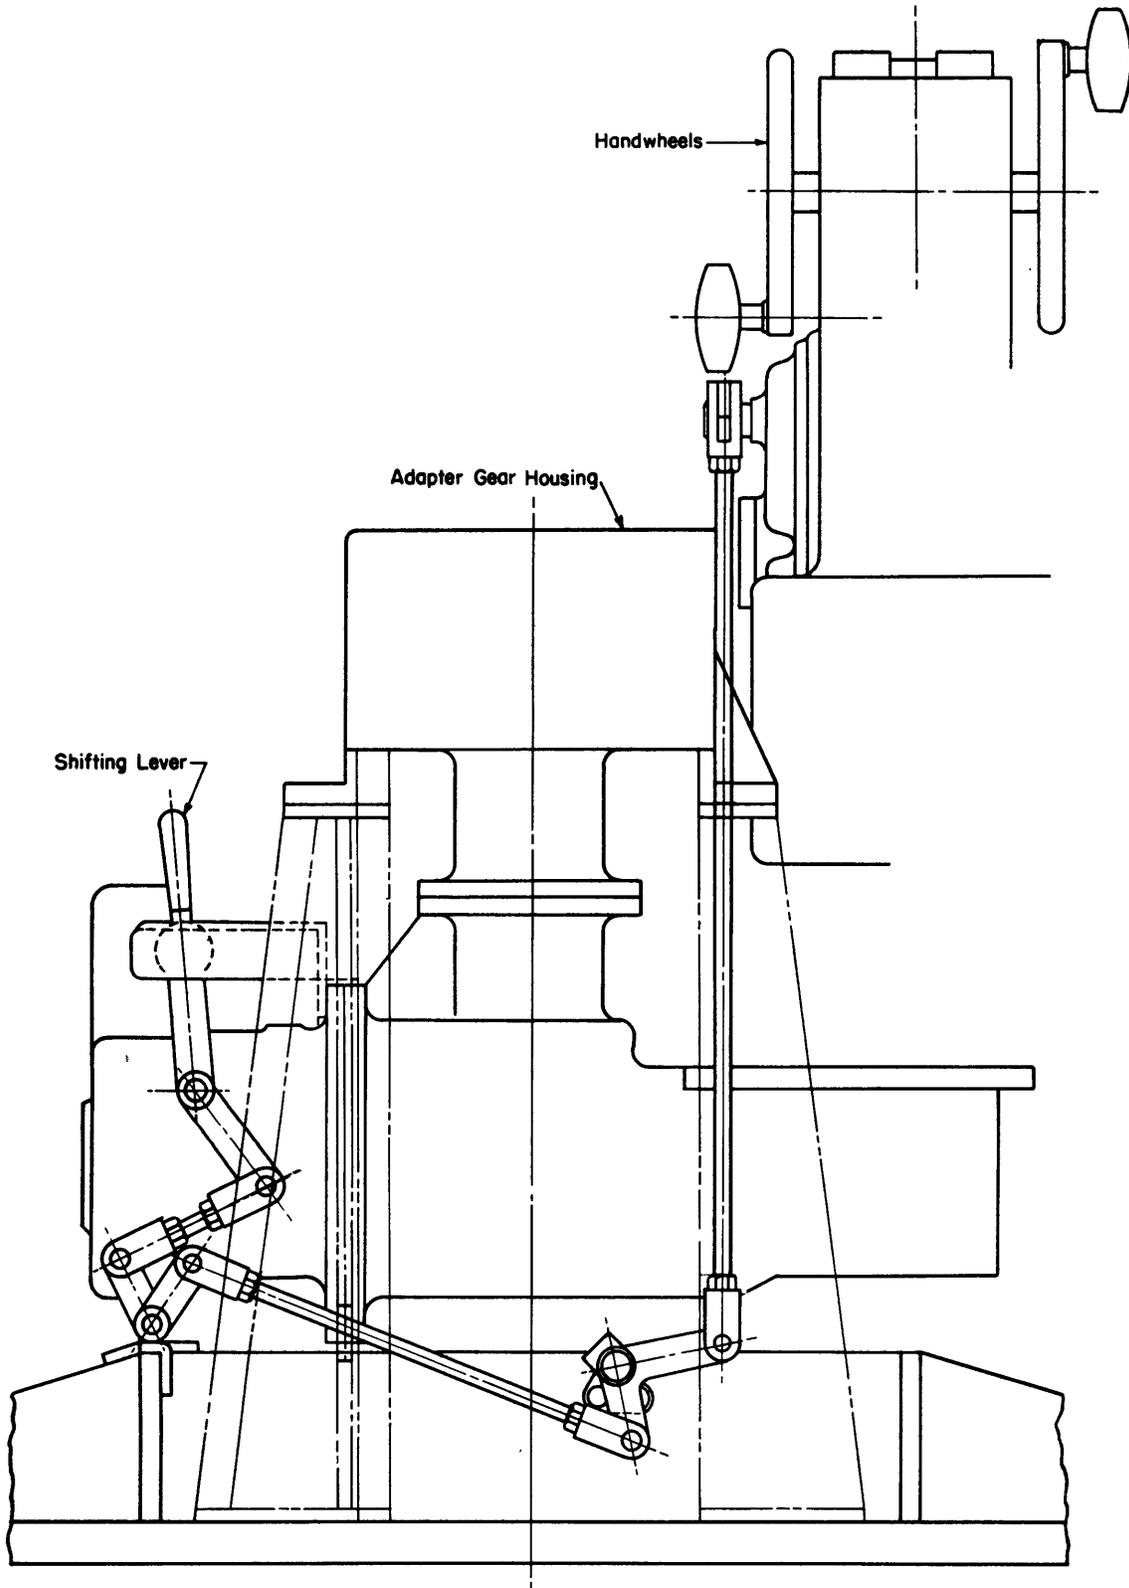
Diagram of the Pitch Control Adapter Assembly between the Power Drive and the Pitch Shaft
